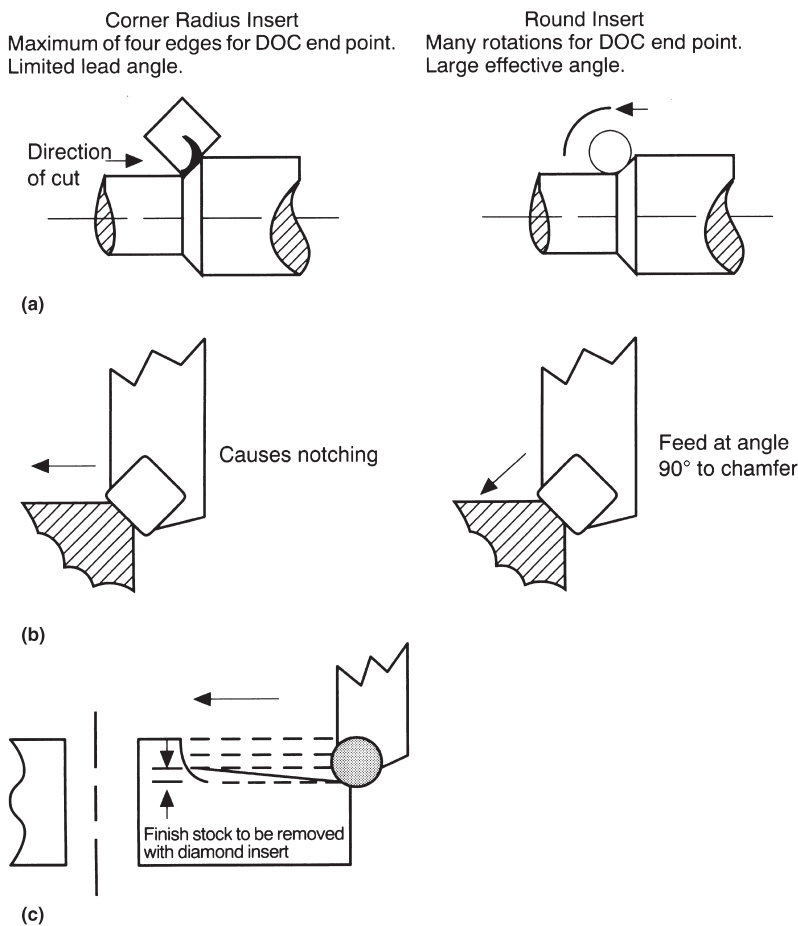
Programming and tooling techniques that will increase tool life when machining nickel alloys with carbide and ceramic tooling. DOC, depth of cut. (a) Turning: A round insert will produce maximum tool life by giving a large lead angle and many rotations to avoid depth of cut failures. (b) Chamfering: Feeding perpendicular to a chamfer produces maximum tool life by distributing the depth of cut wear across the cutting edge. (c) Ramping: This technique will continually move the depth of cut line along the cutting edge, eliminating the notch effect and increasing tool life. Courtesy of Greenleaf Corporation
